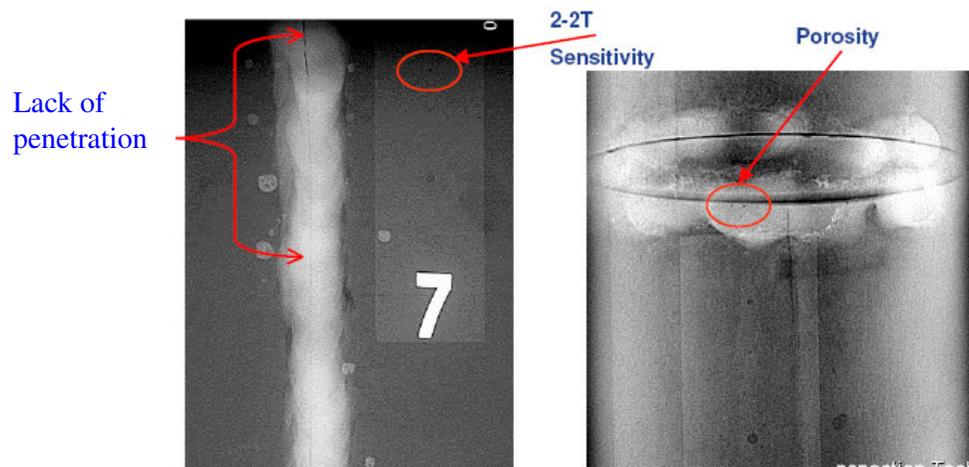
Weld radiography Images taken by indirect type FPD
